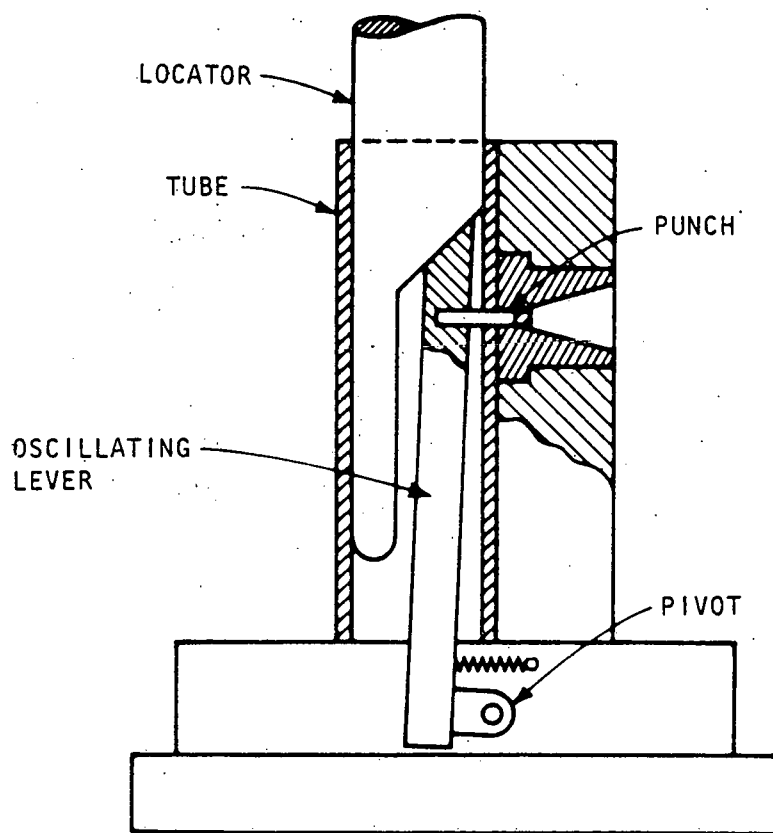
Piercing Burrs Placed on Exterior of Tubular Sleeve
